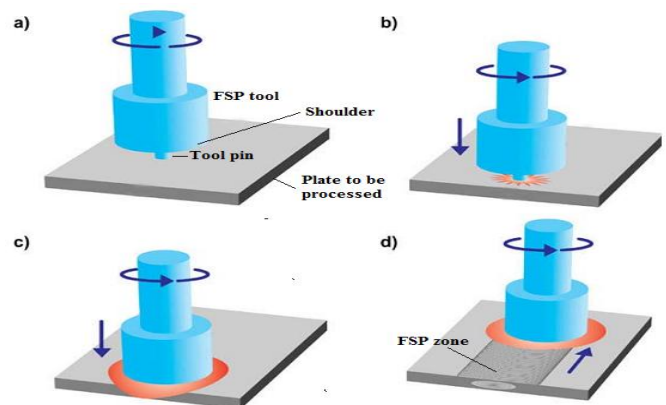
Steps of FSP (a) rotating tool prior to contact with the plate (b) tool pin makes contact with the plate, creating heat (c) shoulder makes contact, restricting further penetration while expanding the hot zone and (d) plate moves relative to the rotating tool, creating FSP zone [5]
